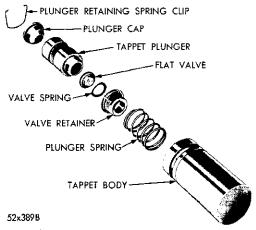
Hydraulic Tappet Assembly (Disassembled View)
